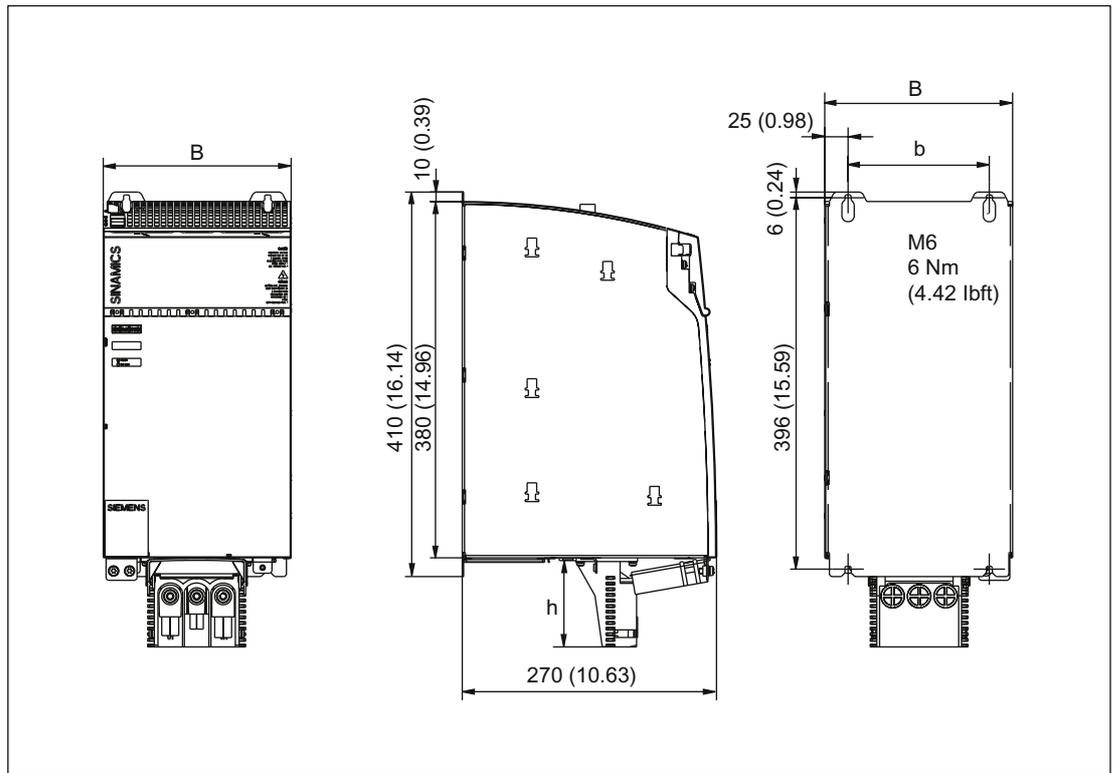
Dimension drawing of Motor Module in booksize format with internal air cooling 45 A to 85 A, all dimensions in mm and (inches)
